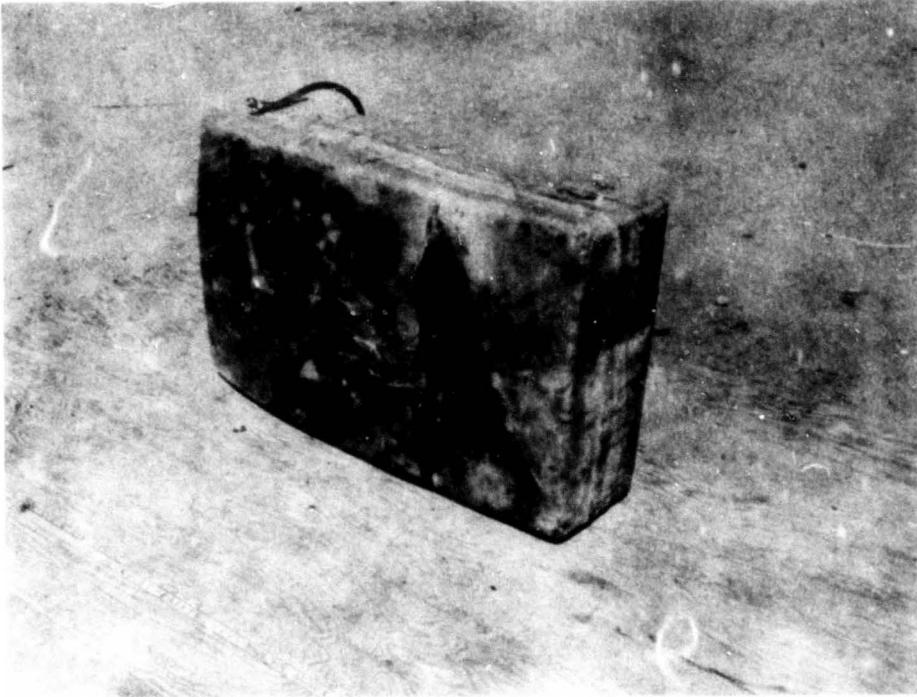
"Tough Wall" Tank Failure, T-23. (The Failure in the Bottom of the Hollow "Tough Wall" Tank Was Due to Rock Impact. The Tank Was Unable To Expand Upward Because of the Modification Made to the Floor To Restrain the Cargo Vertically.)
